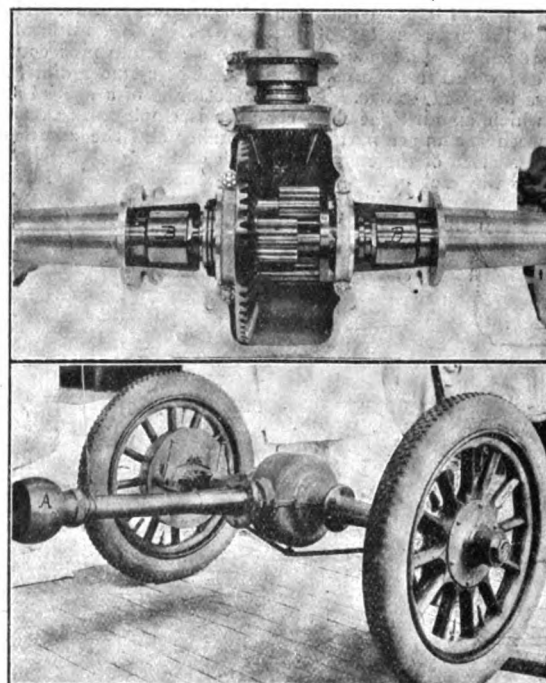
Part Sectional Plan and Elevation of Rear Axle of "Sheffield-Simplex" Six-Cylinder Car, showing inclined road wheels, spur differential gear, double hub brakes and improved brake operating toggle cam.
